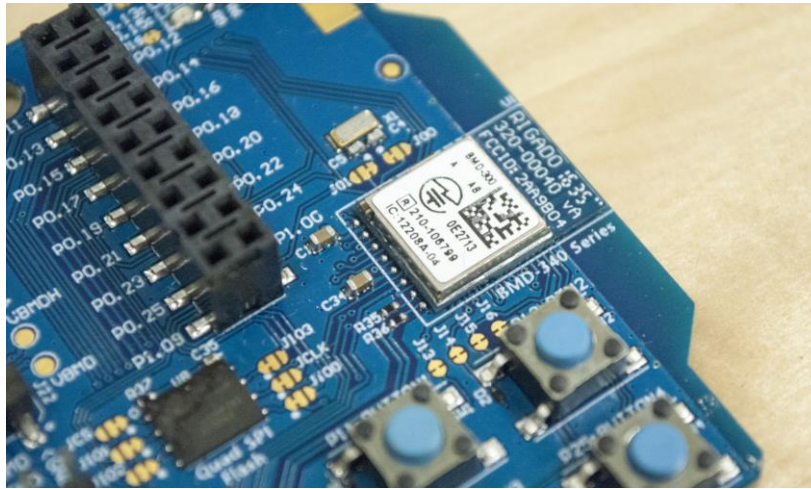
BMD-300 Module Soldered to BMD-340 Footprint
